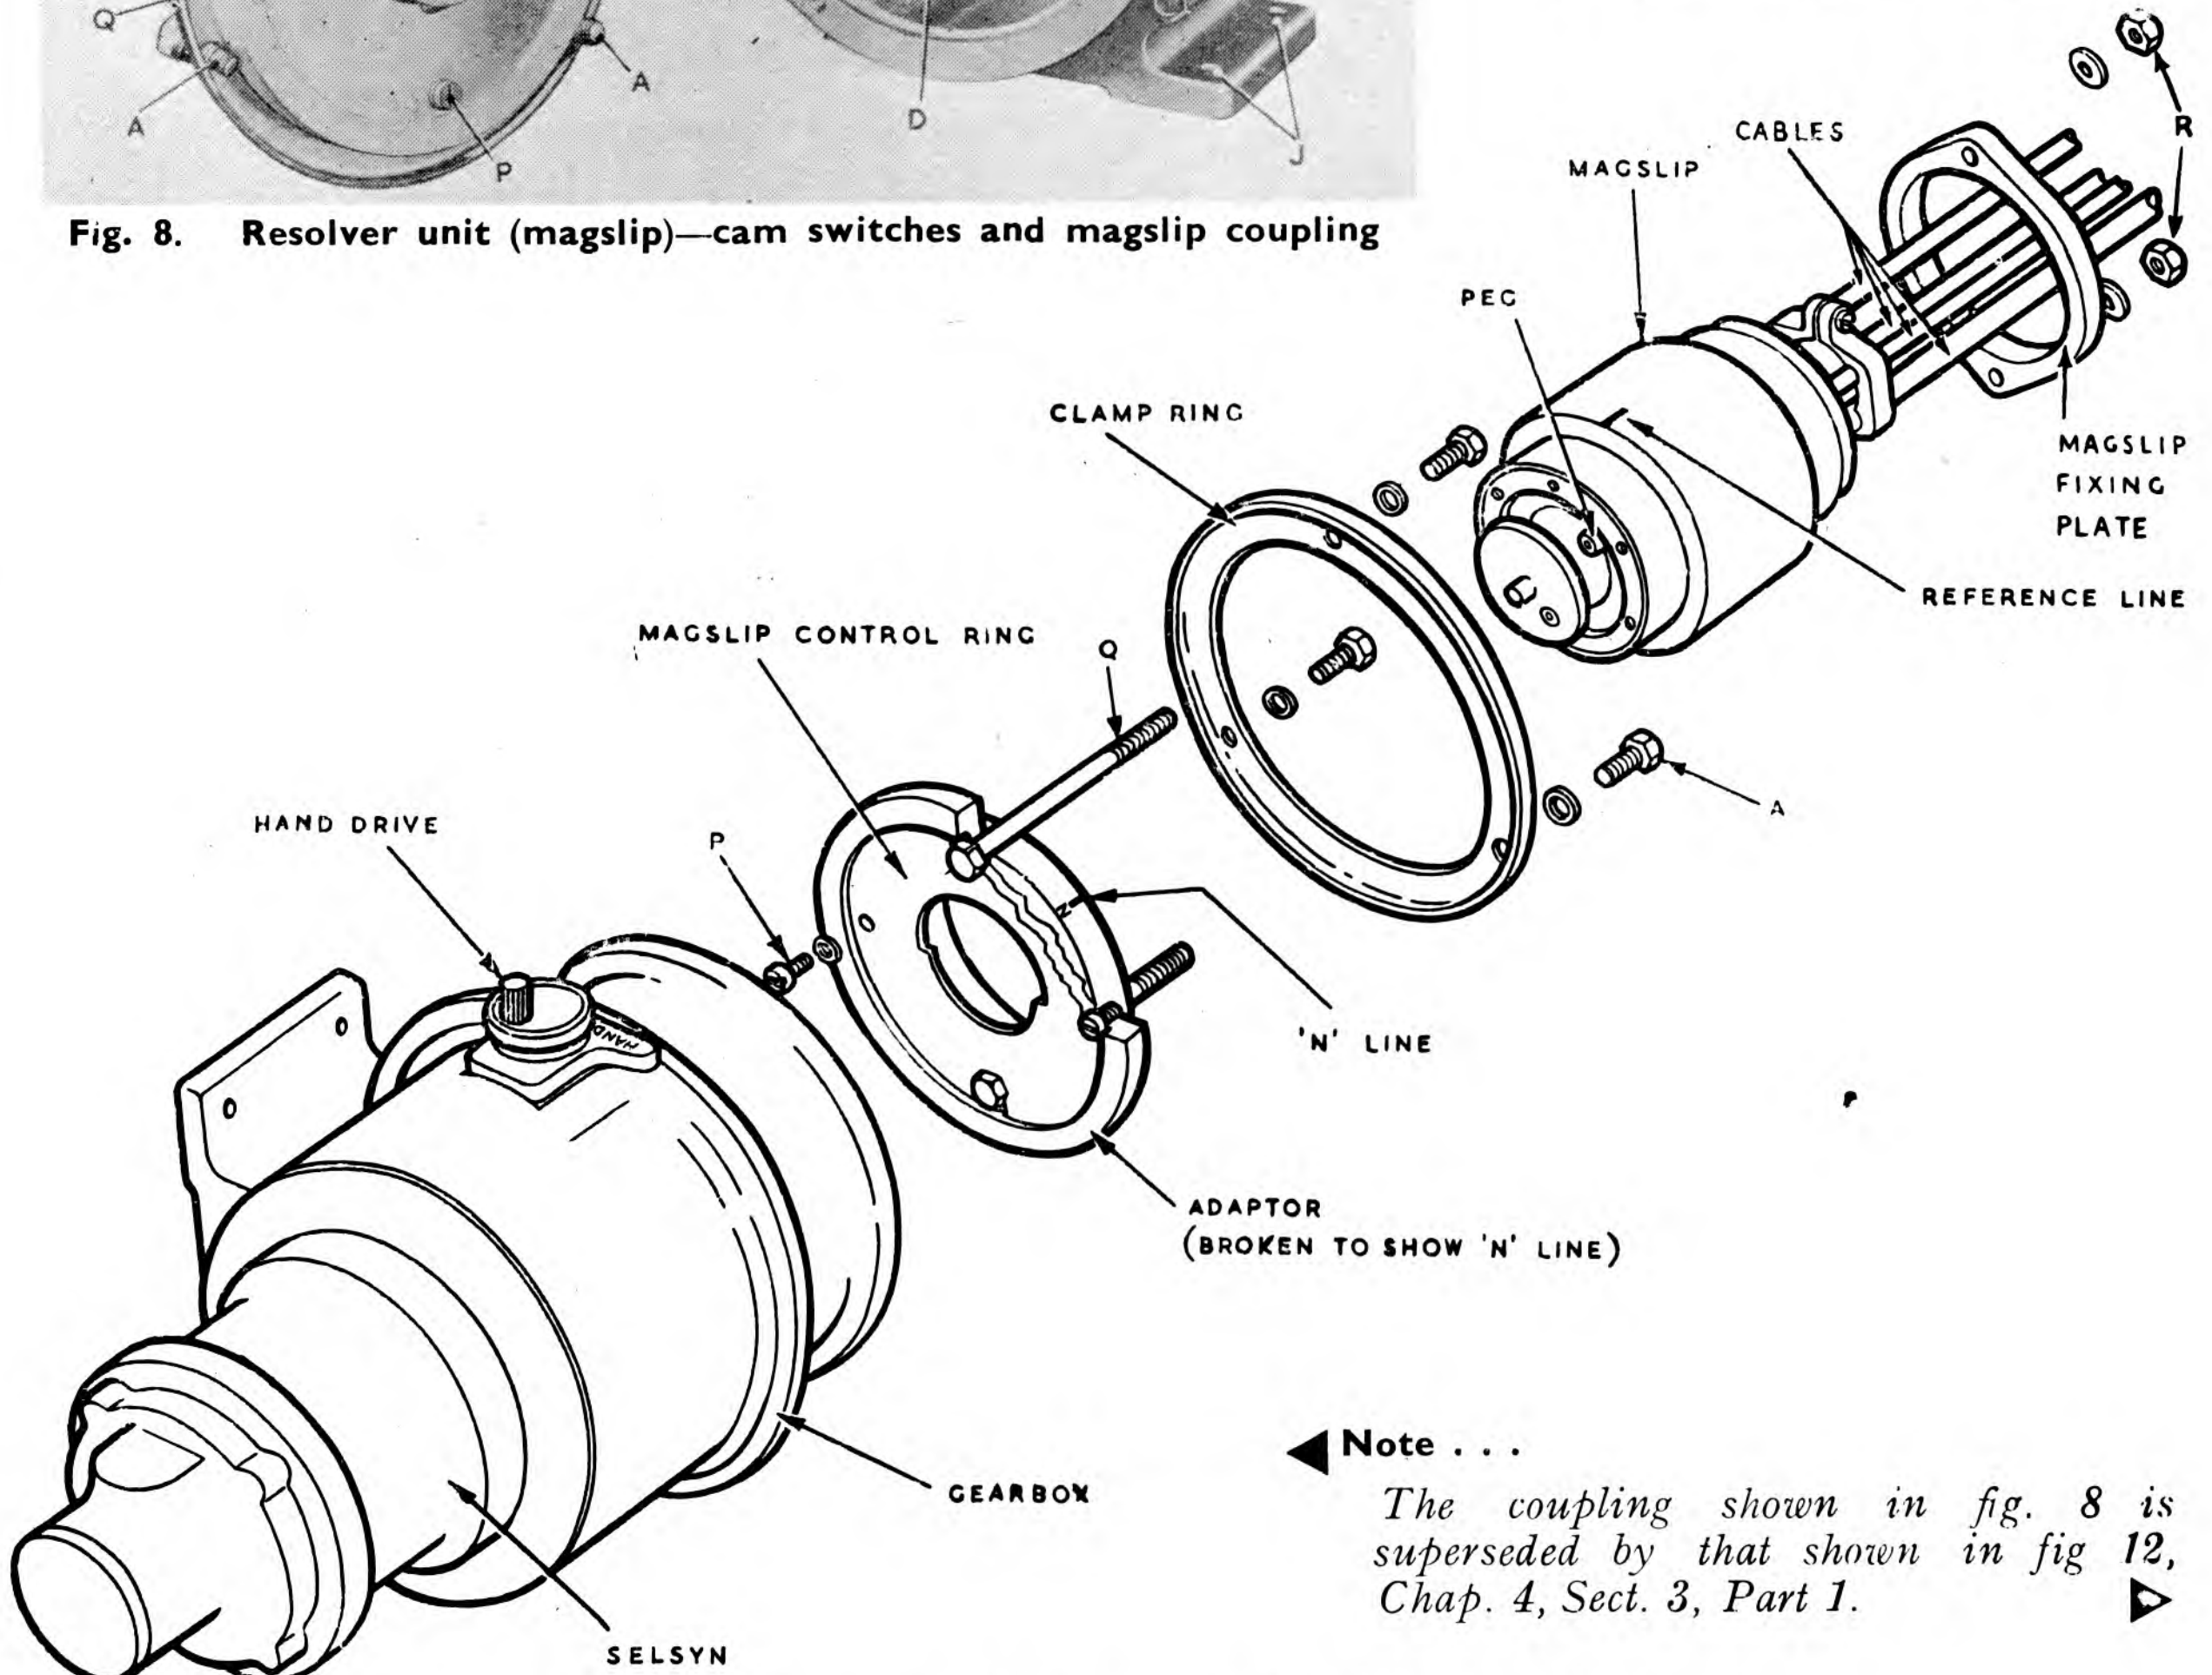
Resolver (magslip)—assembly of magslip to gearbox
